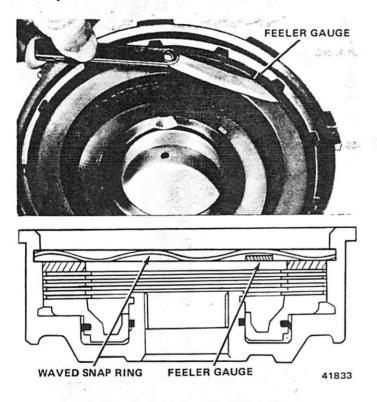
C-71 Measuring Front Clutch Pack Clearance
